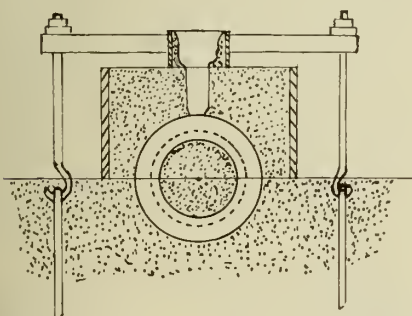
END VIEW SHOWING METHOD OF BINDING MOLD.
